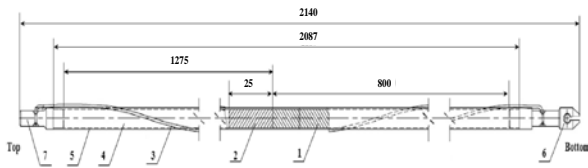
Preliminary schematic diagram of the fuel rod: 1-fuel slug, 2-sodium, 3-wire, 4-plenum, 5-cladding, 6-lower end cap, 7-upper end cap
